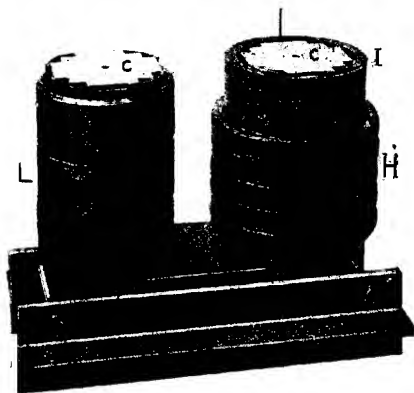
Transformer in Course of Assembly. (Johnson and Phillips.)
